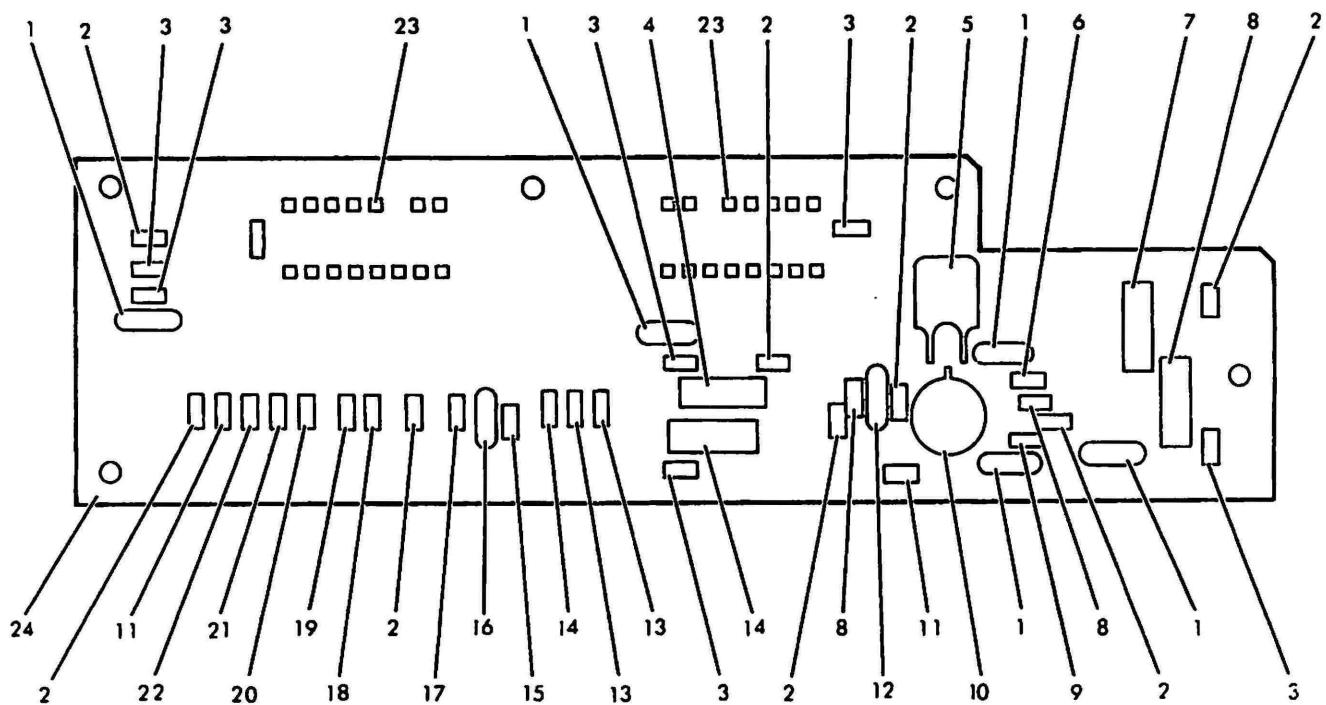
Primary Loop Board Assembly (Sheet 2 of 2)
